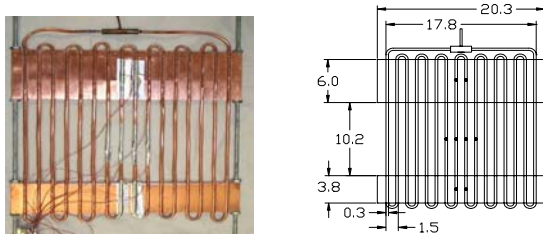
Experimental heat pipe and dimensioned drawing (dimensions: cm)
